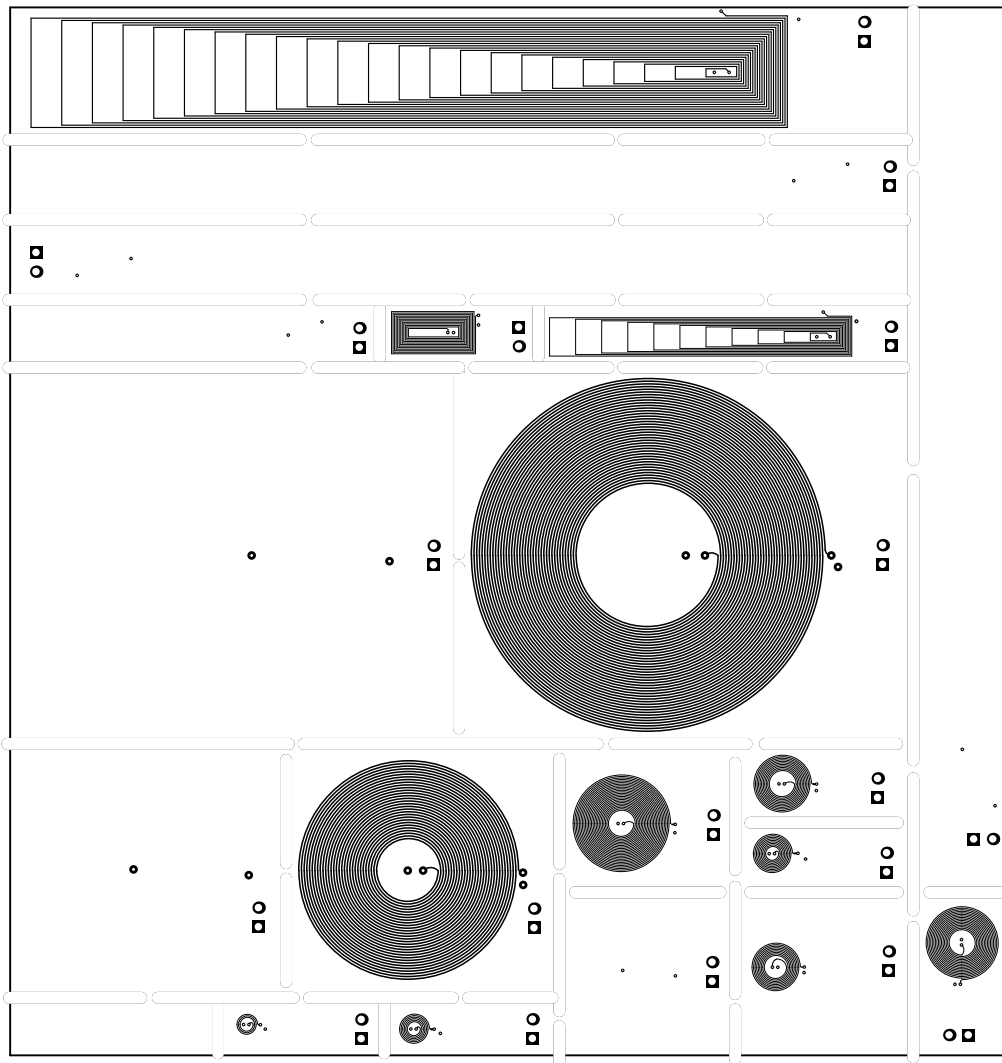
Reference Coils PCB Layout - Mid-Layer 2
